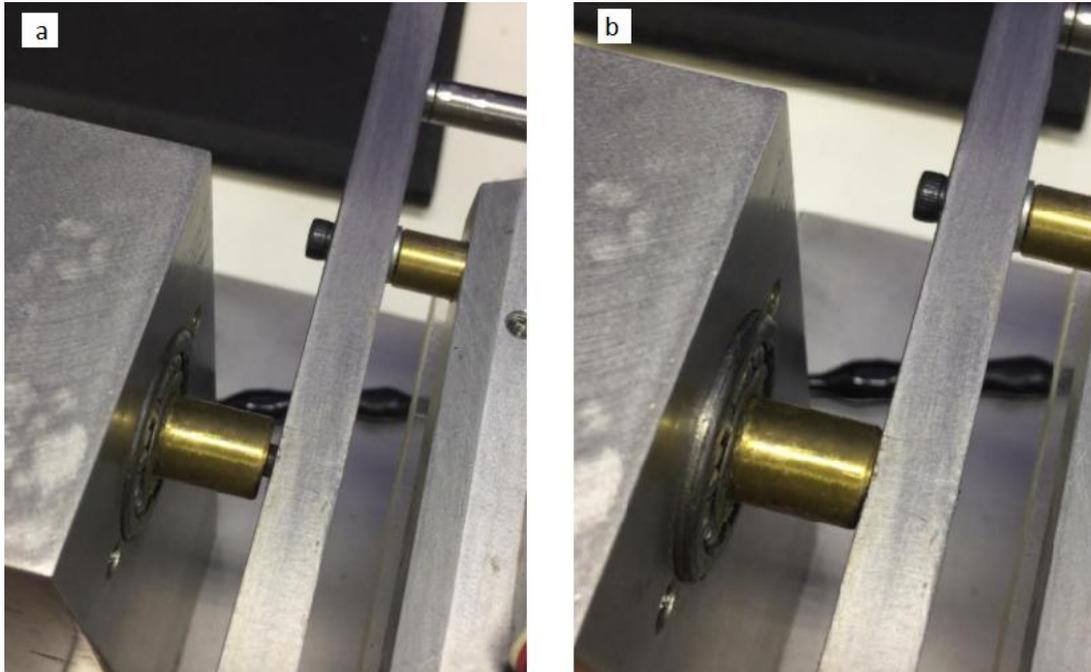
Clearance between axis and bearing (a) and no clearance between axis and bearing after passing bearing retainer glue (b).
